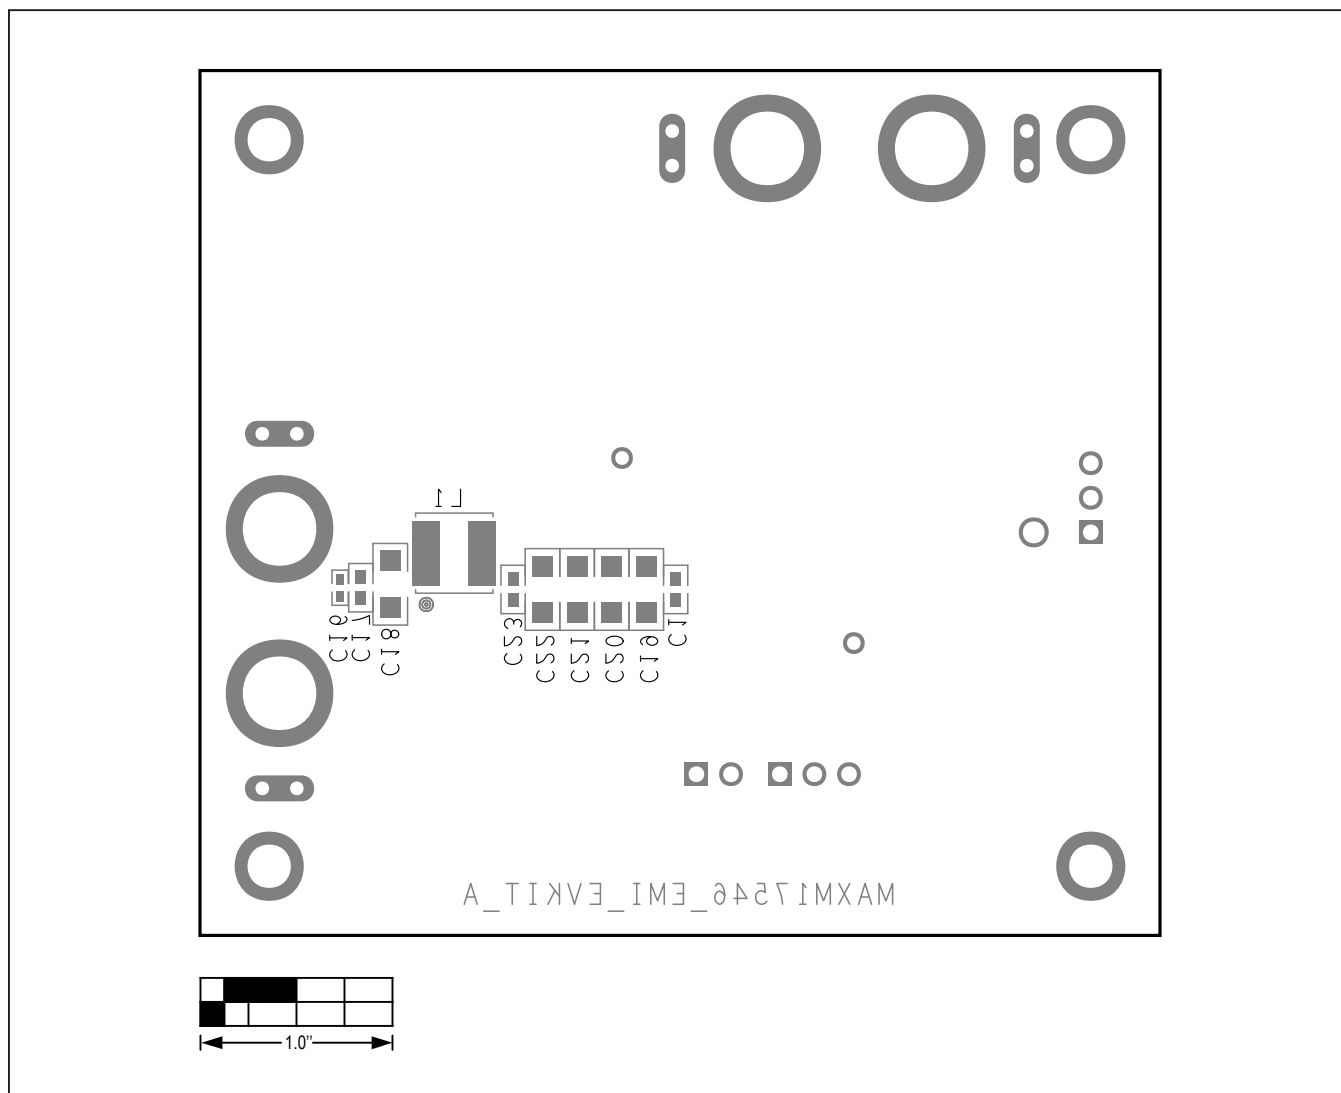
MAXM17546EVKITBE# 5V Output EV kit PCB Layout—Bottom Silkscreen
